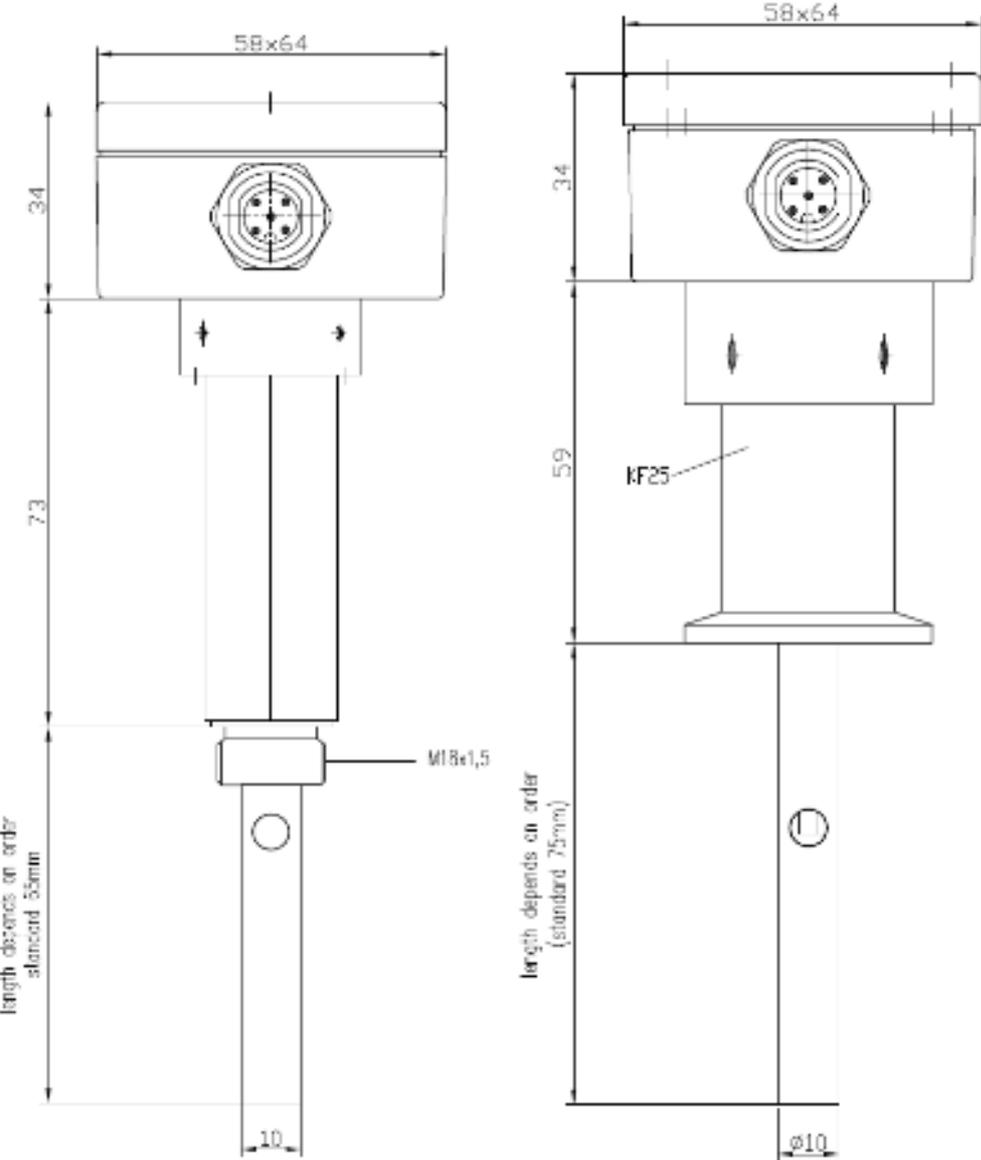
Scale drawings of probe with screw-in thread (left) and flange (right)
